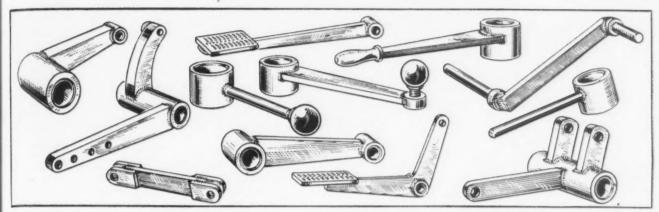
Typical machinery operating levers that are being weld-fabricated at lower cost with arc welding.
